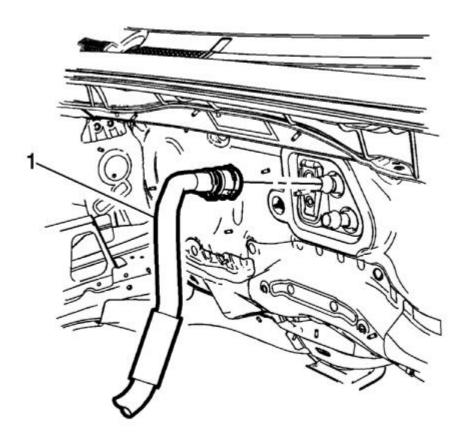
Heater Outlet Hose Courtesy of GENERAL MOTORS COMPANY
